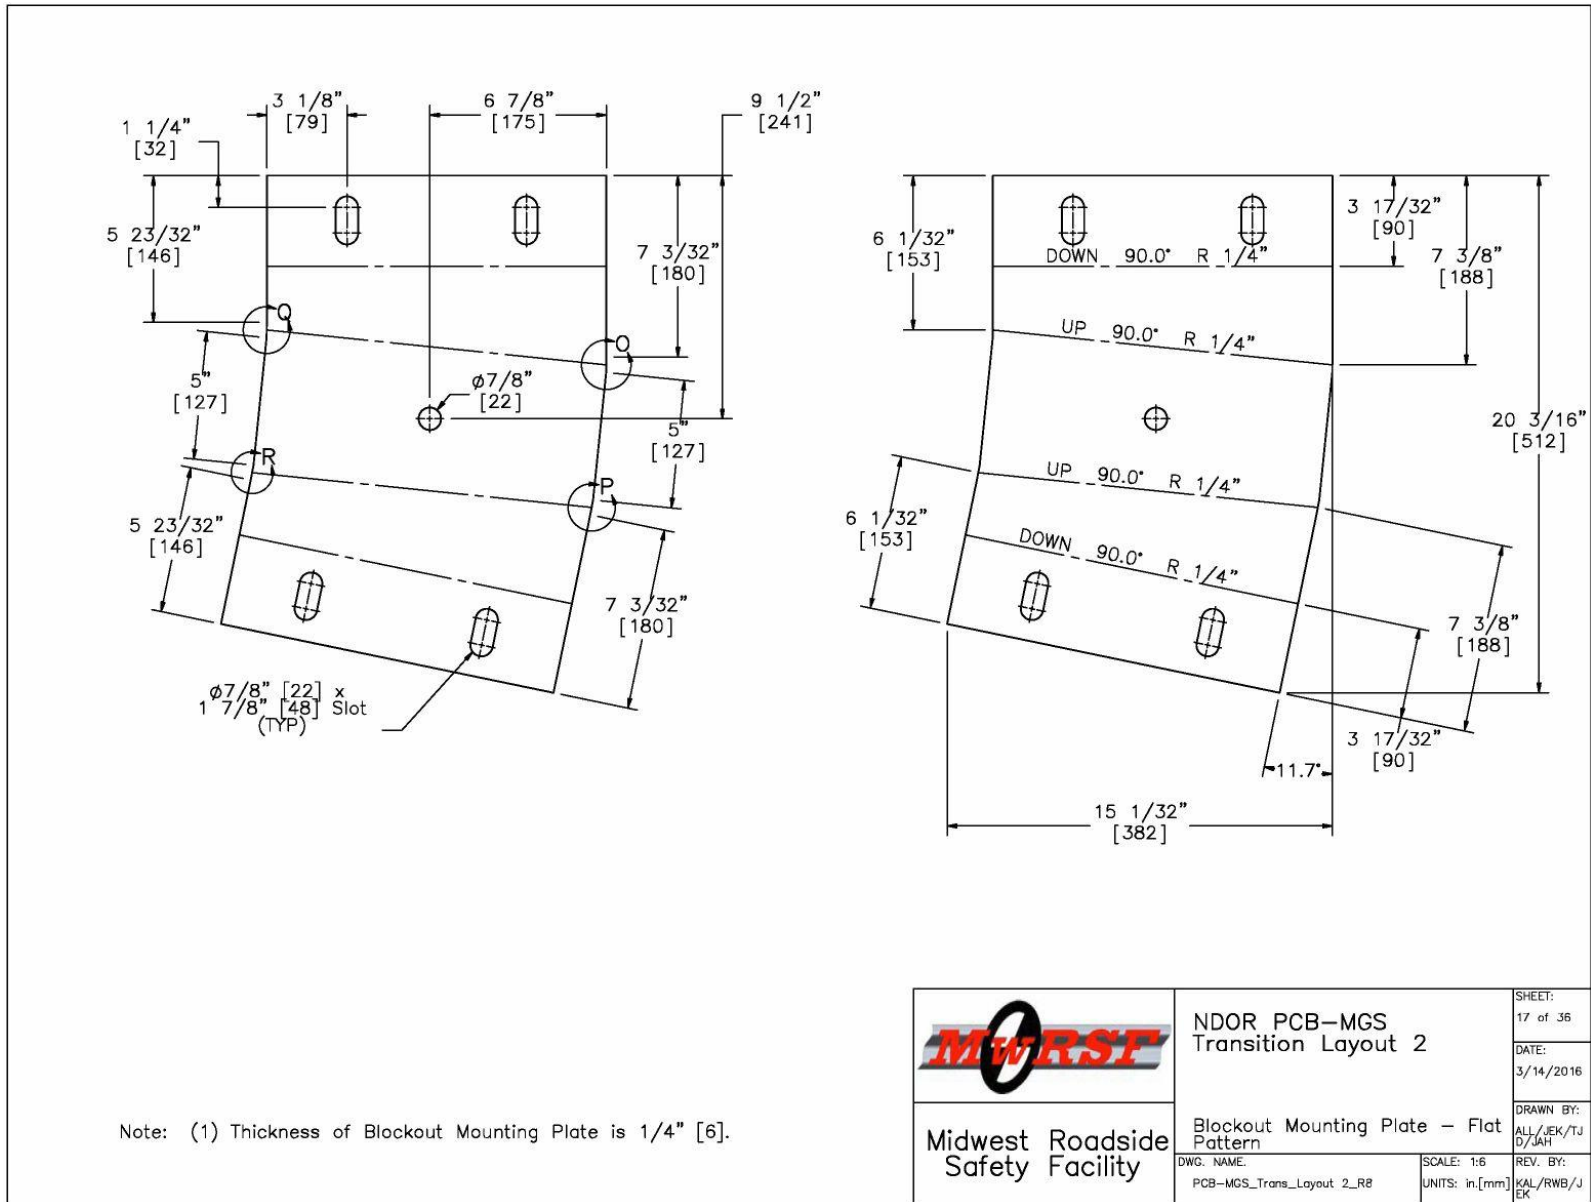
Blockout Mounting Plate, Flat Pattern, Test No. MGSPCB-1
